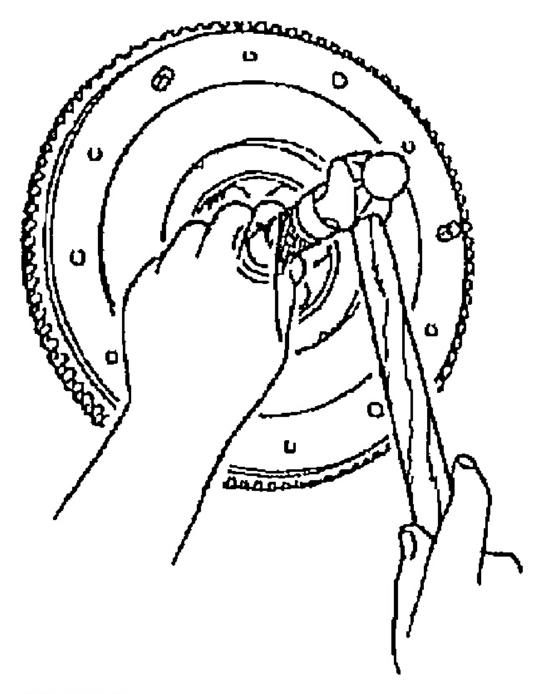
Securing Flywheel Using SST Courtesy of MAZDA MOTORS CORP.
